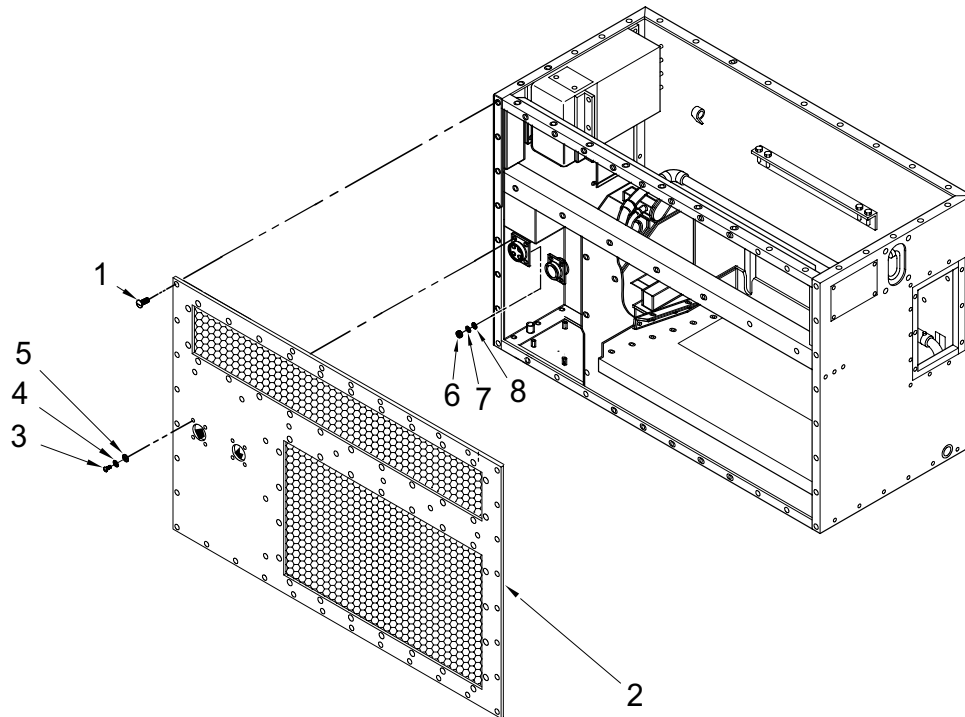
EVAPORATOR ASSEMBLY FRONT COVER.
